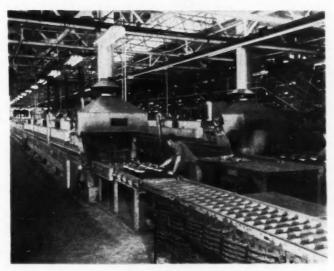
Converter units are brazed in these 184-ft long furnaces
